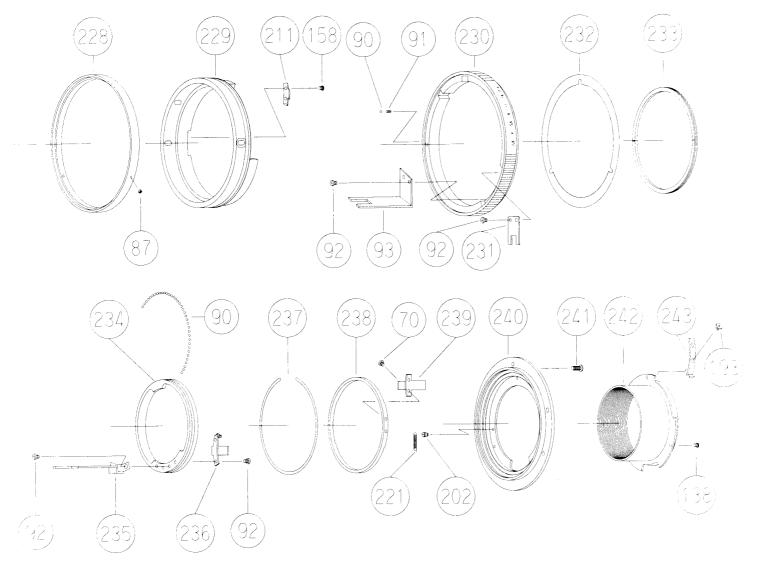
Yashica/Contax Mount Assembly (Ref. 532)
